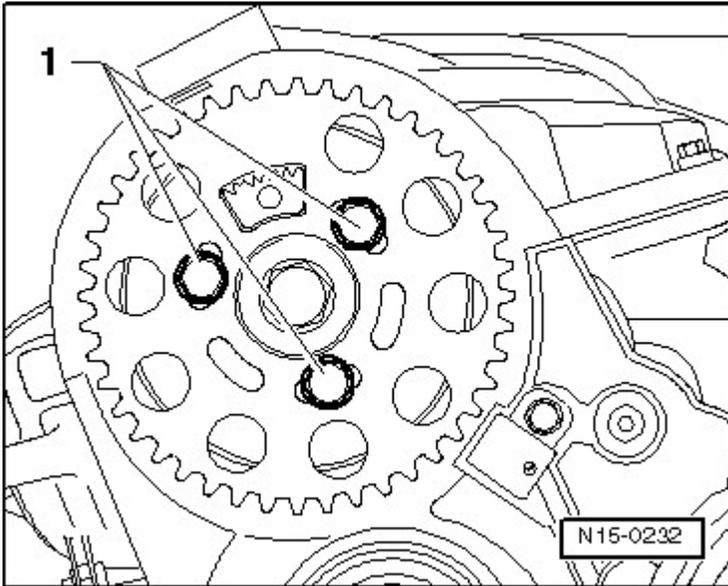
Identifying Camshaft Pulley Securing Bolts
